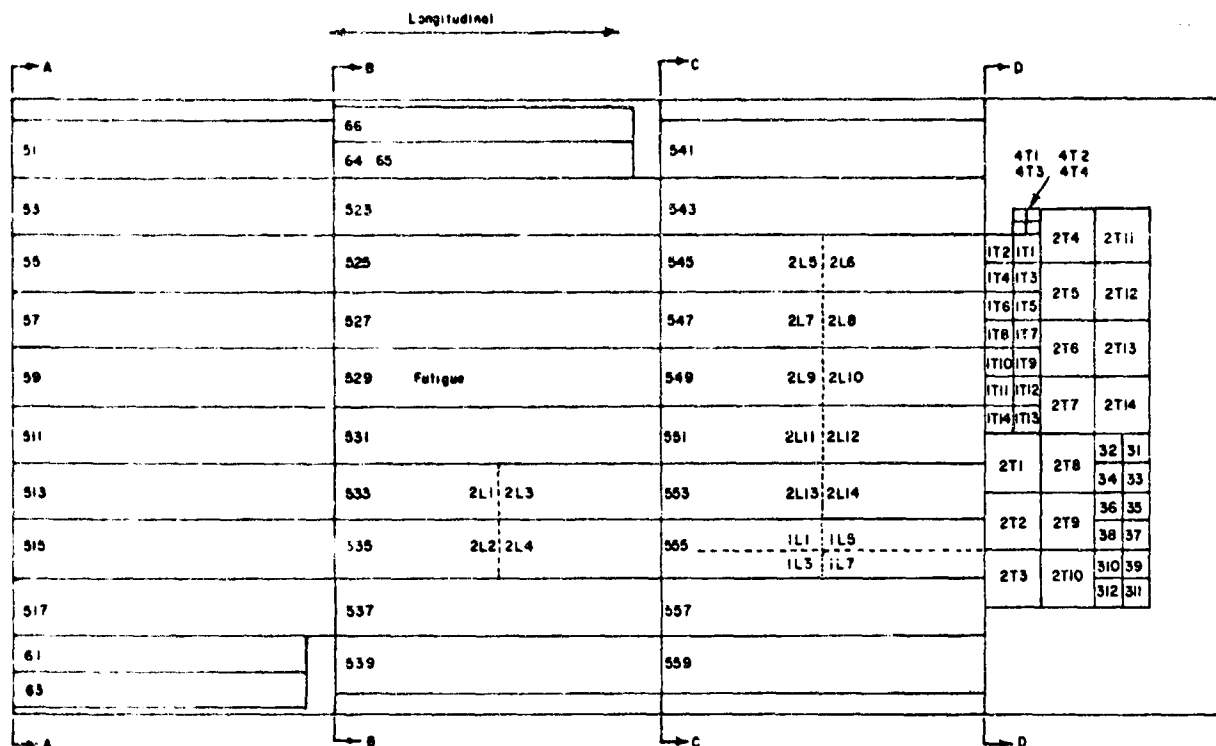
SPECIMEN LAYOUT FOR 300M FORGINGS
